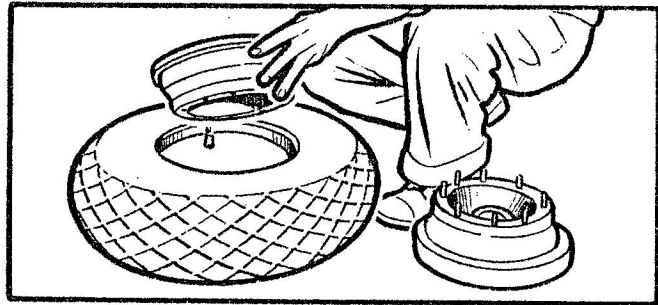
Inserting Section of Wheel with Valve Hole in Tire
